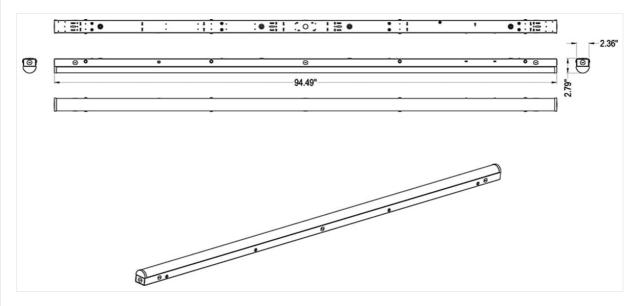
Dimensional drawing of the RAB SR8 fixture. This diagram illustrates the length (94.49 inches), width (2.36 inches), and height (2.79 inches) of the fixture, along with potential mounting points.
